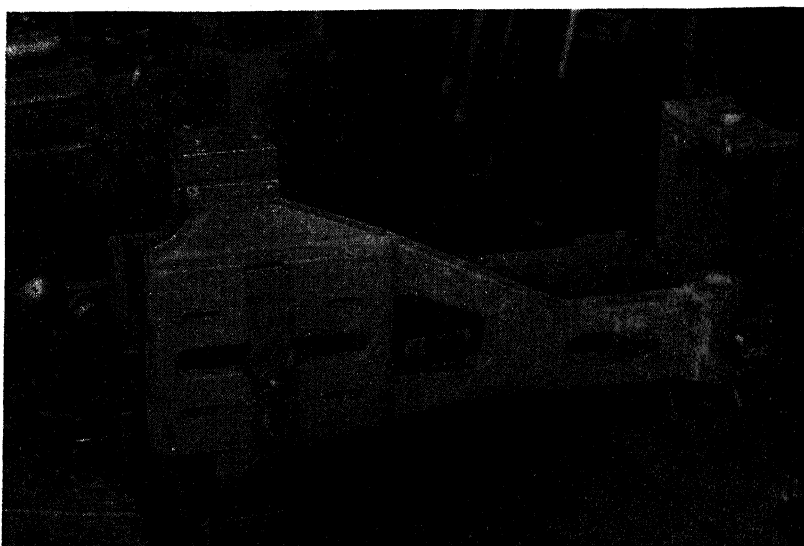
Welded steel jig used by a manufacturer of wood-working machines. Assures greater machining tolerances. Welding saved 40% in cost.
